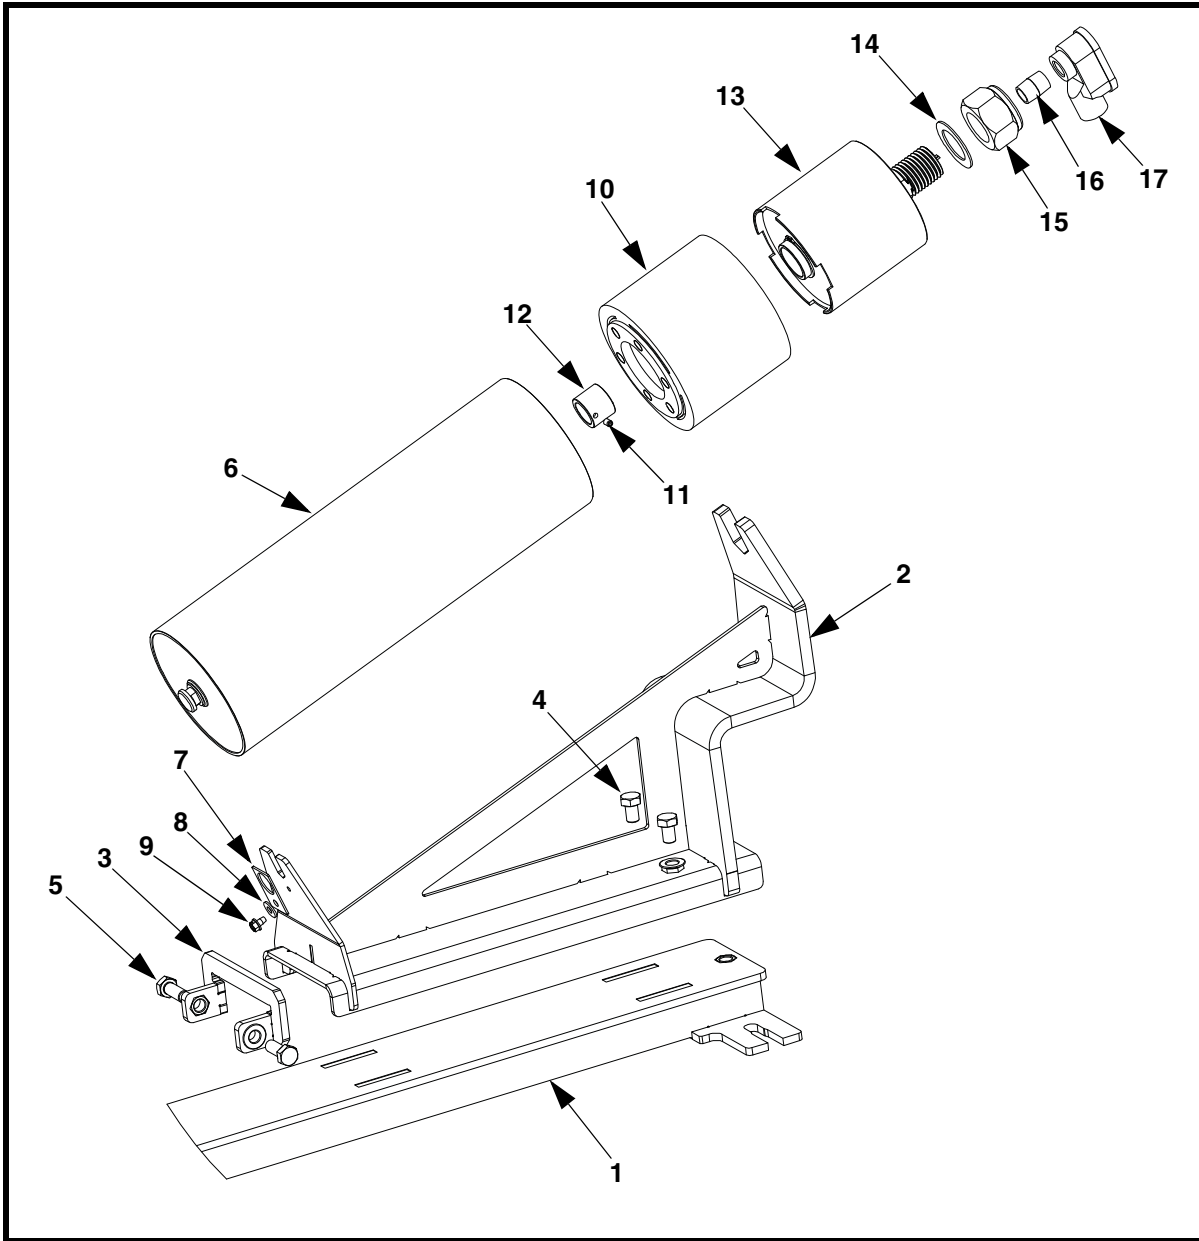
Martin® Roll Generator Assembly, P/N RGTMIEXP-XXXX1XX
